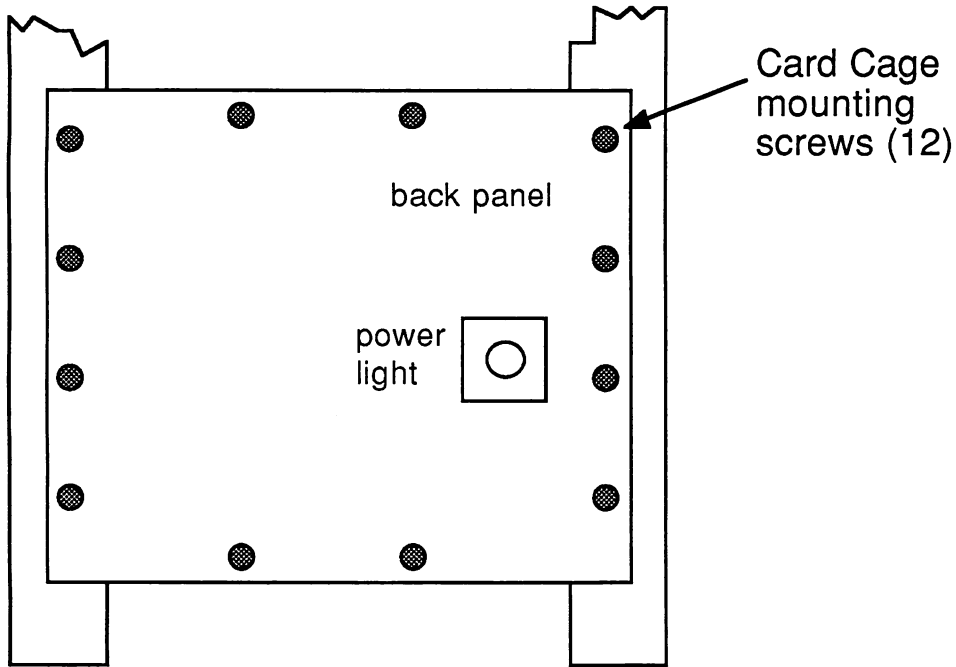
VME Card Cage Back Panel--Jumper Access
